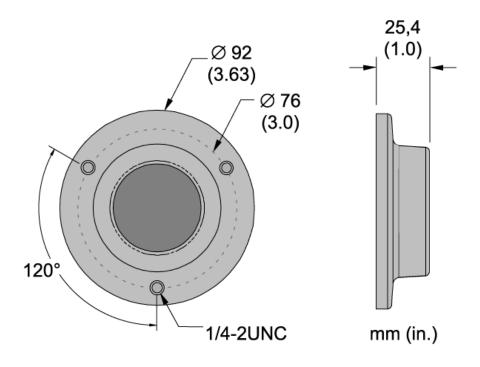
Mounting Flange for Sighting Tube (E-MST)
